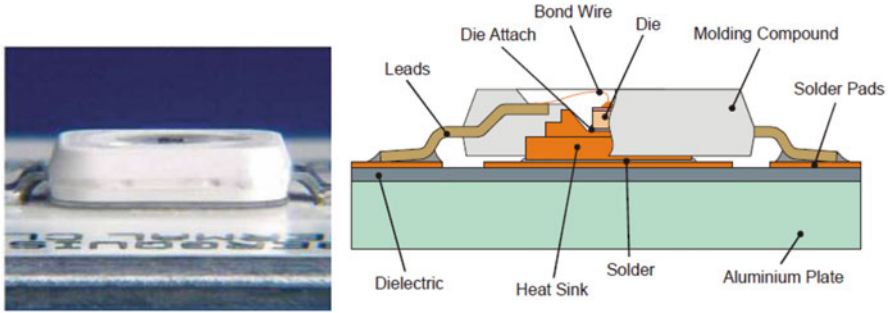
Standard metal-core PCB with optimized layout for improved thermal management designed for HTOL tests (Provided by OSRAM Opto Semiconductors GmbH)
